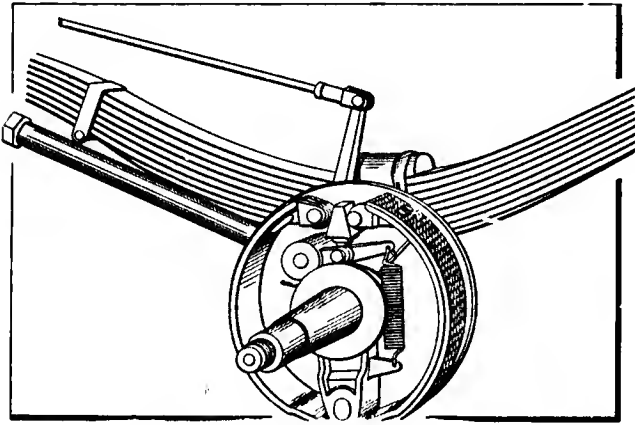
End of rear axle with wheel removed, showing brake-drum, band, facing, and toggle system
